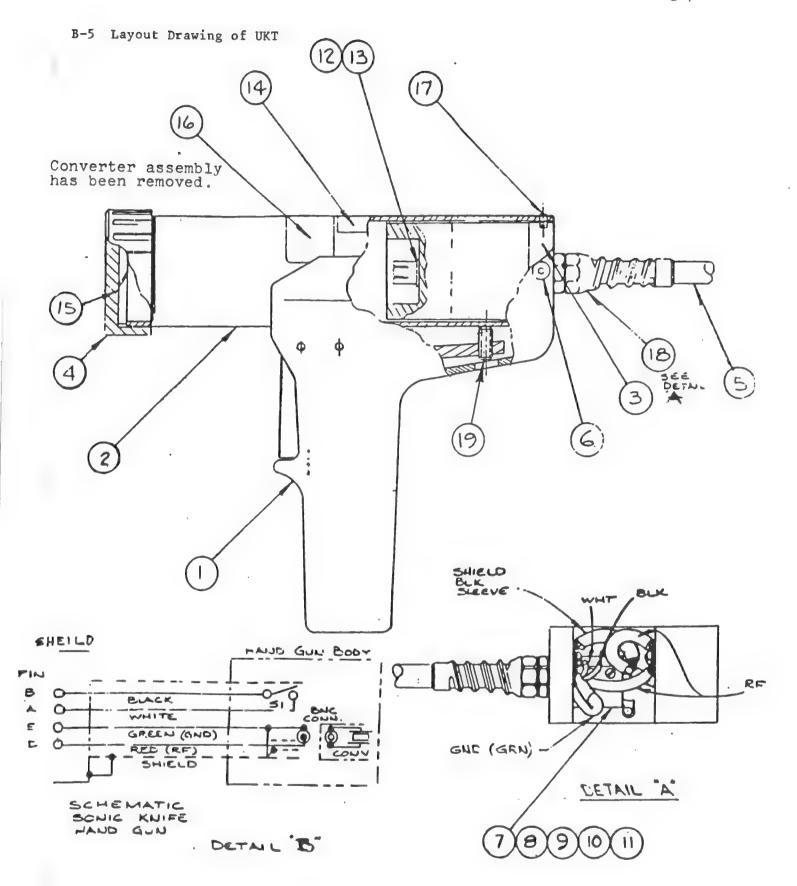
Layout Drawing of Ultrasonic Trim Knife
